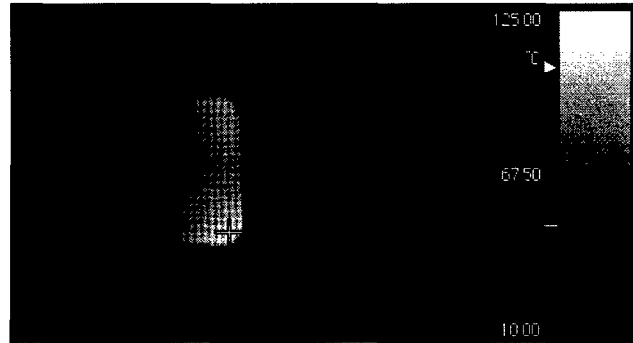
Infra-red image from the test setup exhibiting a hot area due to poor solder bond. The grid pattern is due to the screen covering the waveguide hole.
